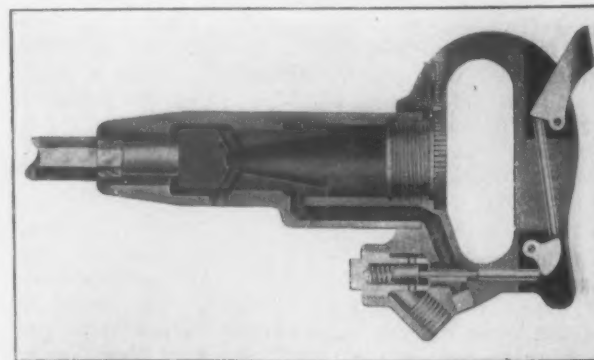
Sectional View of the Pittsburgh Chipping Hammer.
